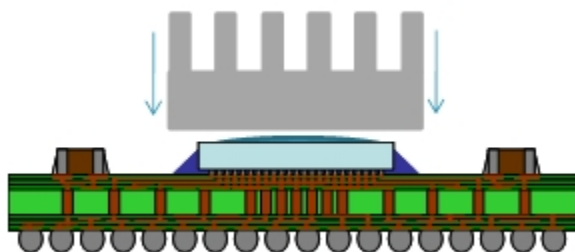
Non-parallel alignment of heat-sink surface and die
